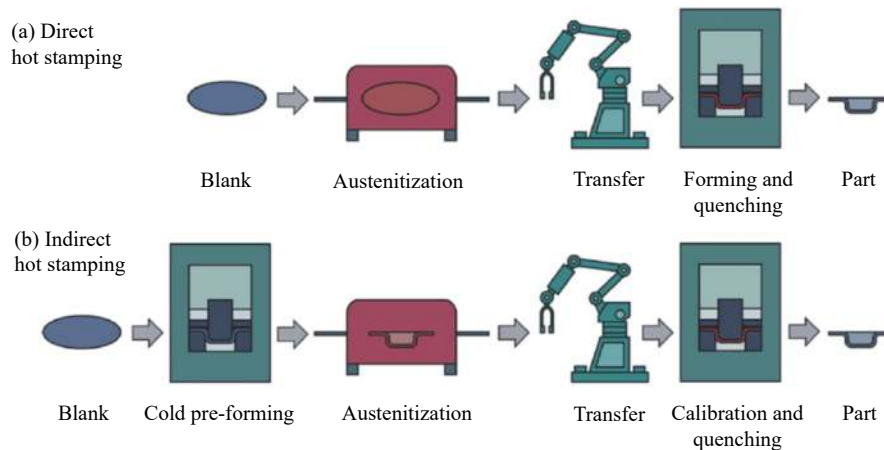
Schematic of hot forming: (a) direct hot stamping, (b) indirect hot stamping. Reprinted from *J. Mater. Process. Technol.*, 210, H. Karbasian and A.E. Tekkaya, A review on hot stamping, 2103-2118, Copyright 2010, with permission from Elsevier.
